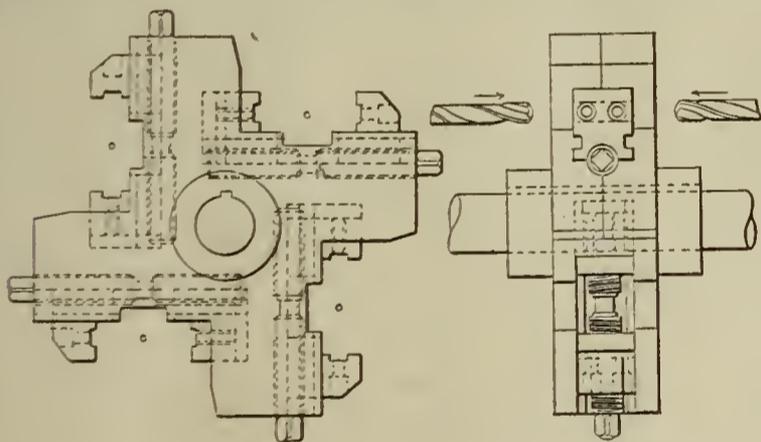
DETAILS OF CHUCK FOR EIGHT-SPINDLE TURRET MACHINE.
